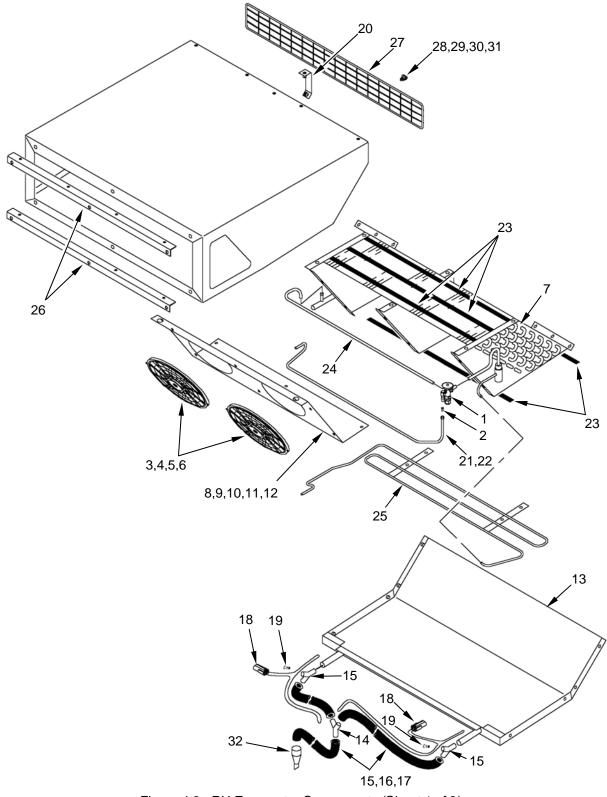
RU Evaporator Components (Sheet 1 of 2).
